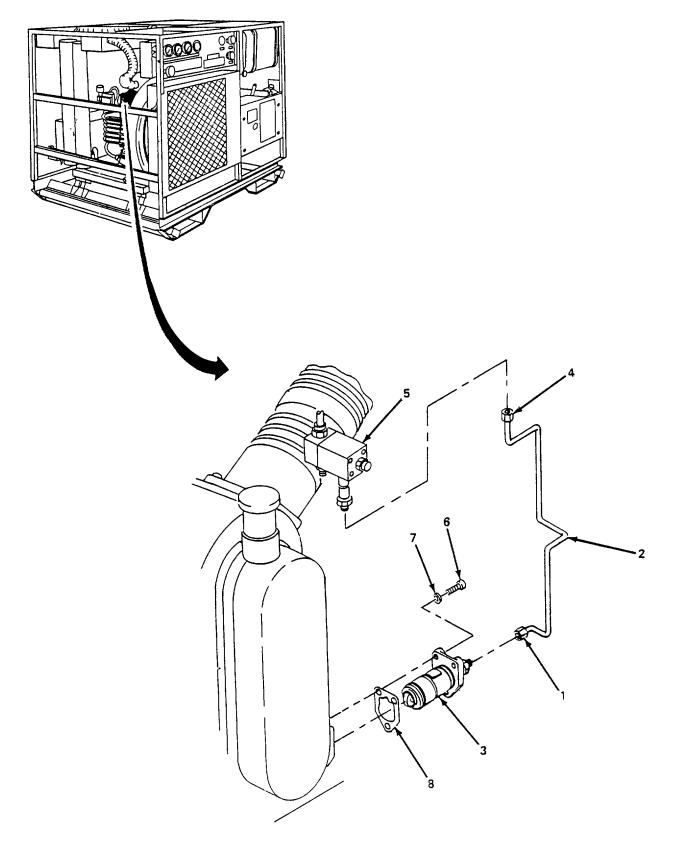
Compressor Oil Pump and Supply Line, Replace.
